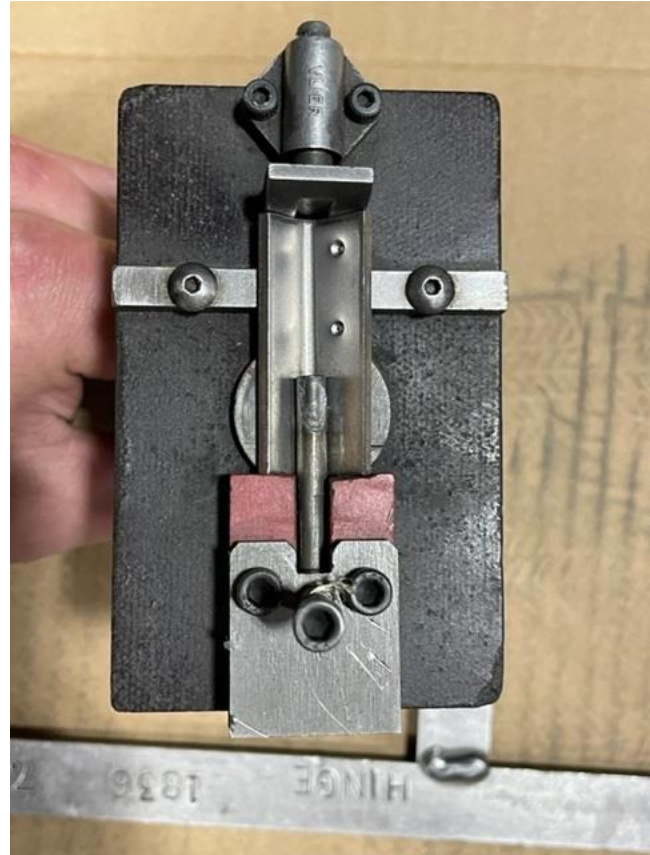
Adjustable Hinge Pin Alignment Fixture (Top View)
